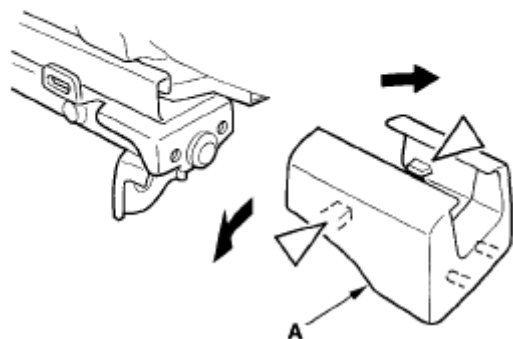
Removing Front Rail Covers From Front Of Seat Tracks
